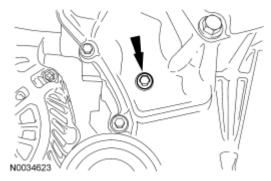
Identifying 6 mm x 18 mm Bolt Courtesy of FORD MOTOR CO.
